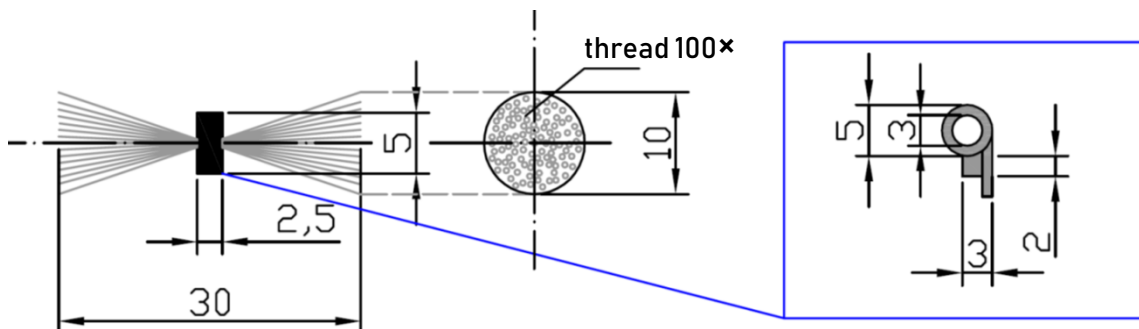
Technical drawing of tassel arrangement. Dimensions in mm.
